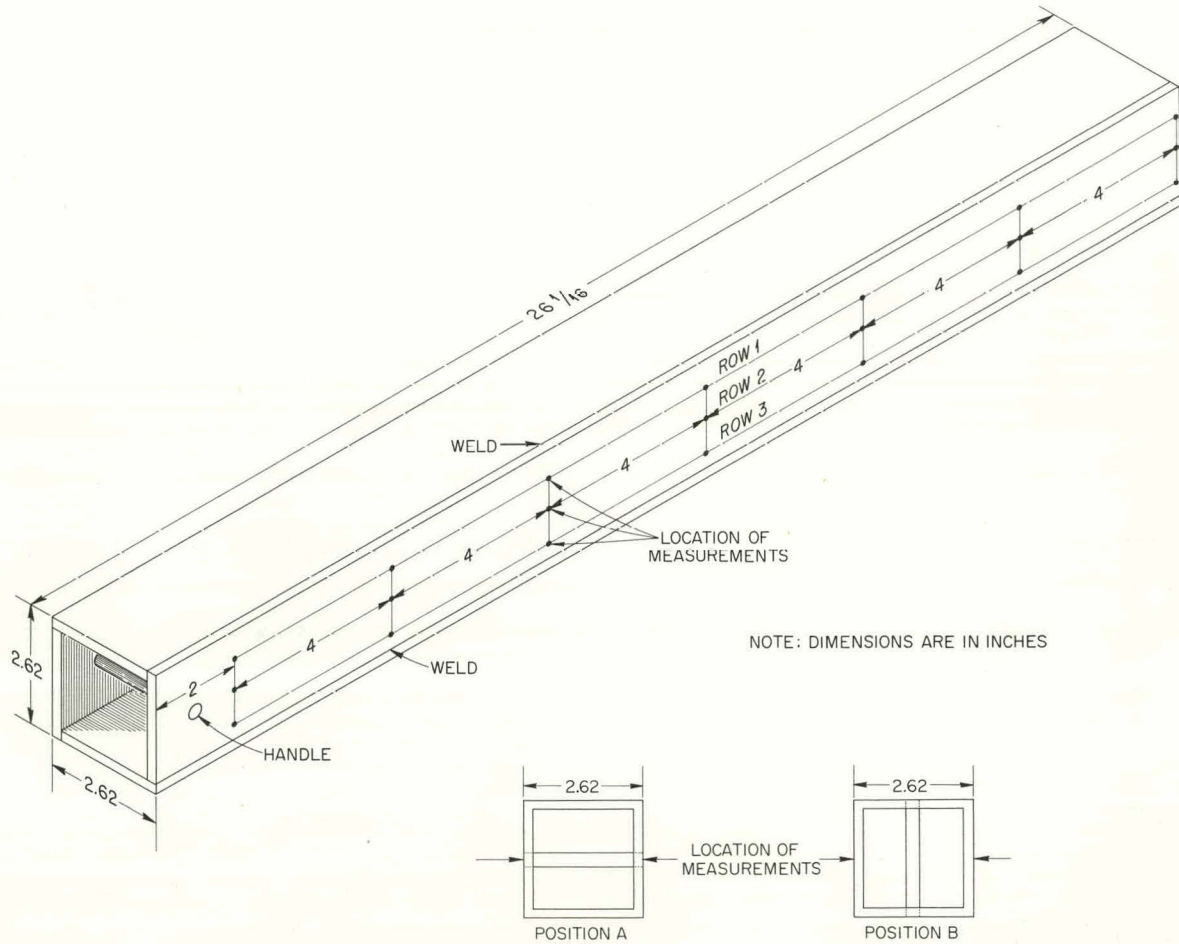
Locations of Dimensional Measurements of Welded BG-1 Neutron Absorber Section for SM-1 Test.
